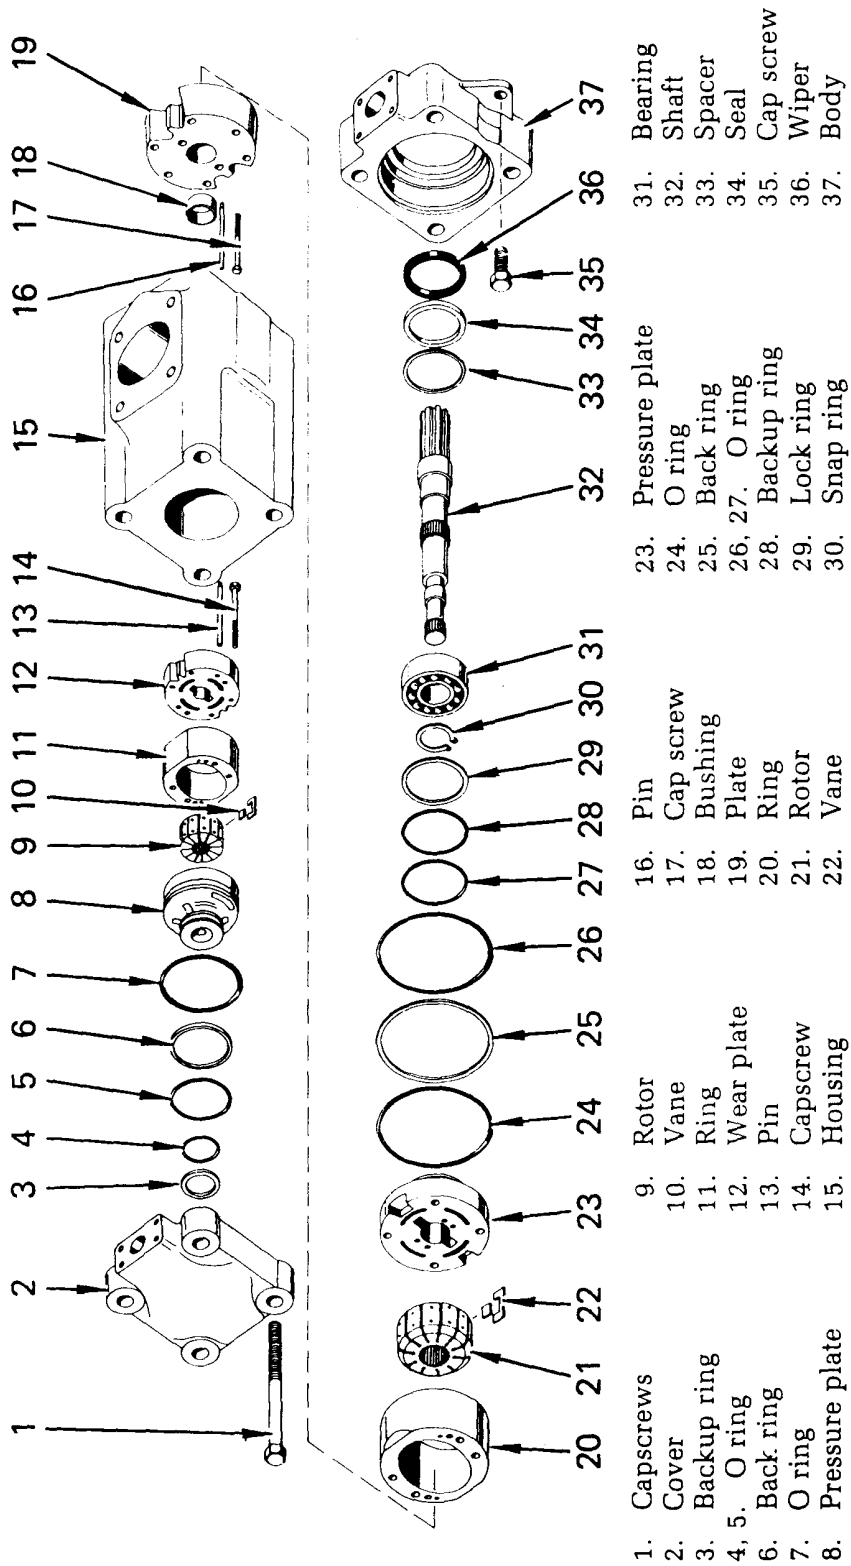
Hydraulic pump assembly. (WABCO, An American-Standard Company)
